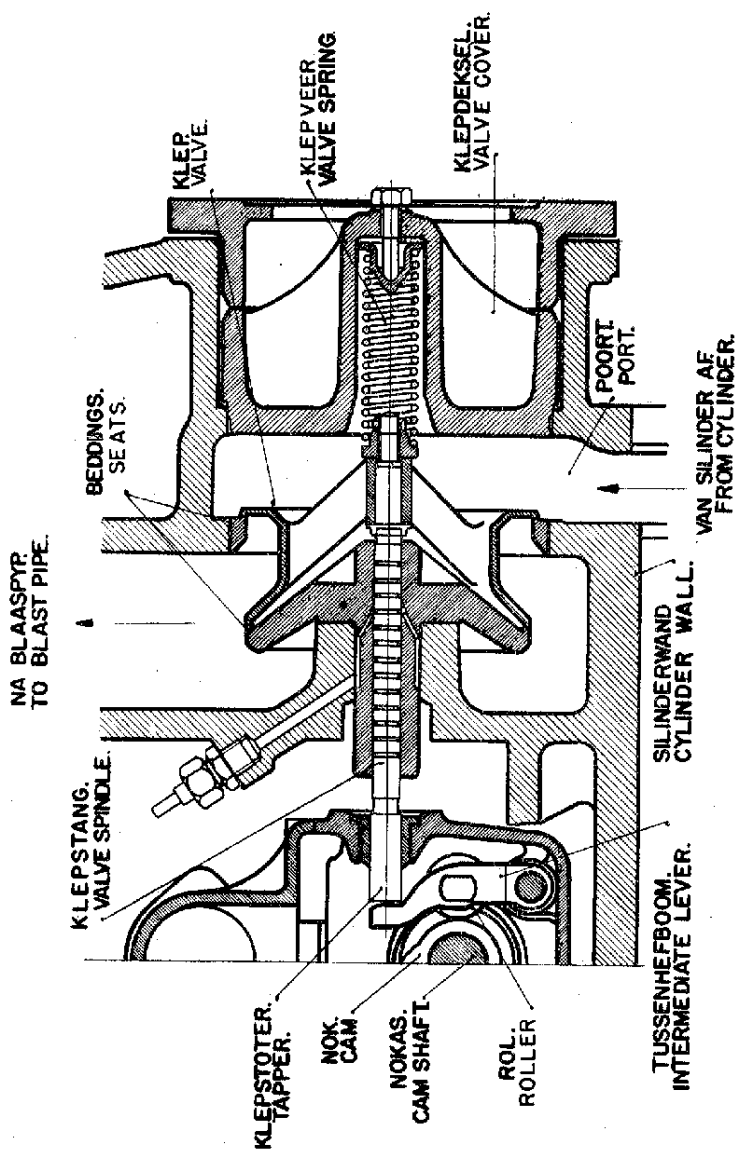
ARRANGEMENT OF VALVES - "R.C." VALVE GEAR.
